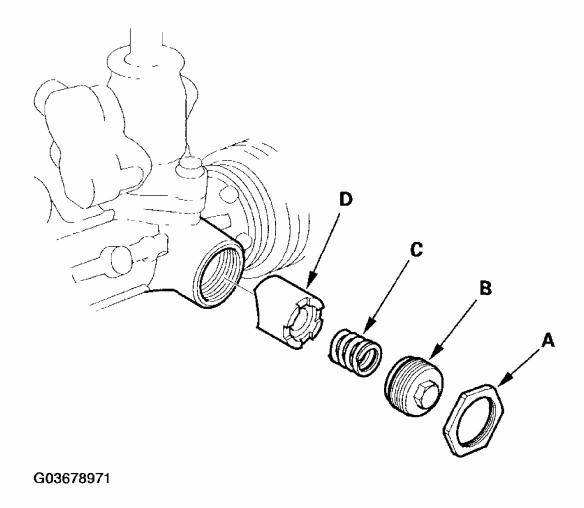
Removing Rack Guide Screw, Spring And Rack Guide From Steering Gearbox
